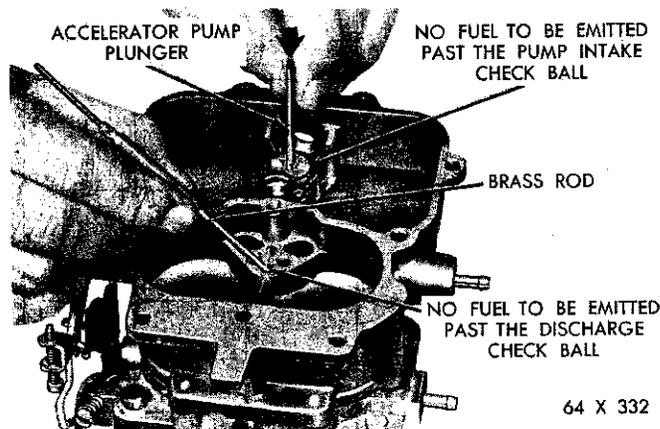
Testing the Accelerator Pump Intake and Discharge Check Balls
